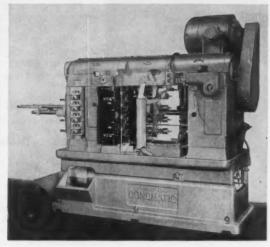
Cone "4-Hi," 1-inch capacity bar machine which is able to handle four work-pieces simultaneously
